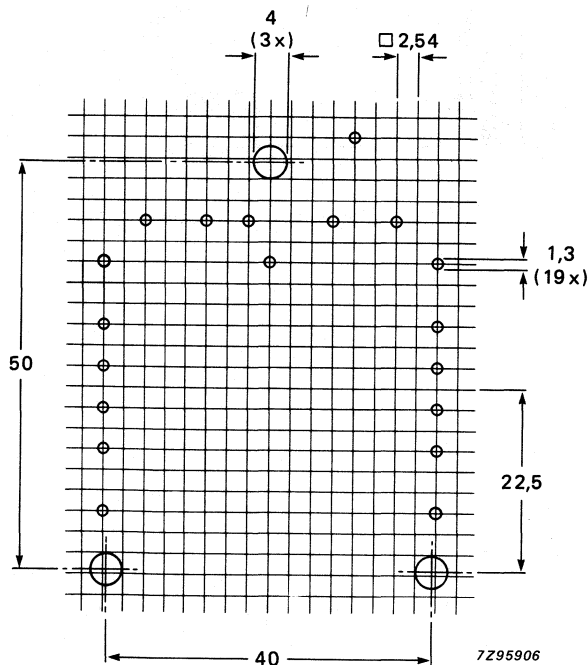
Hole pattern for mounting on a printed-wiring board (solder side).
